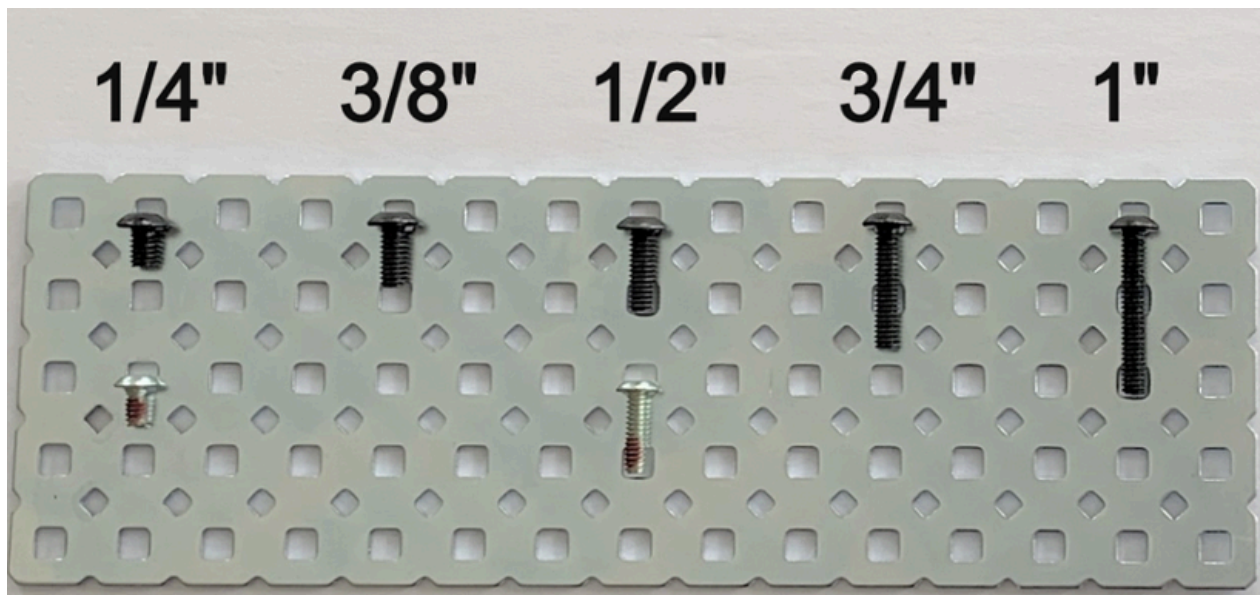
Black 8-32 Screws, Gold 6-32 Motor Screws, and 15 x 5 Hole Steel Plate
